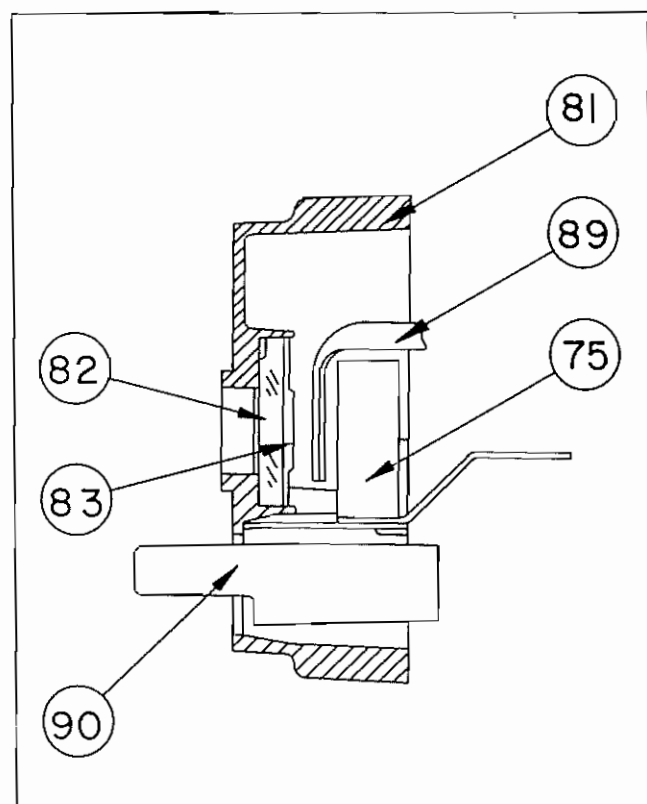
ESCUTCHEON - END VIEW - 987727 - RADIO
